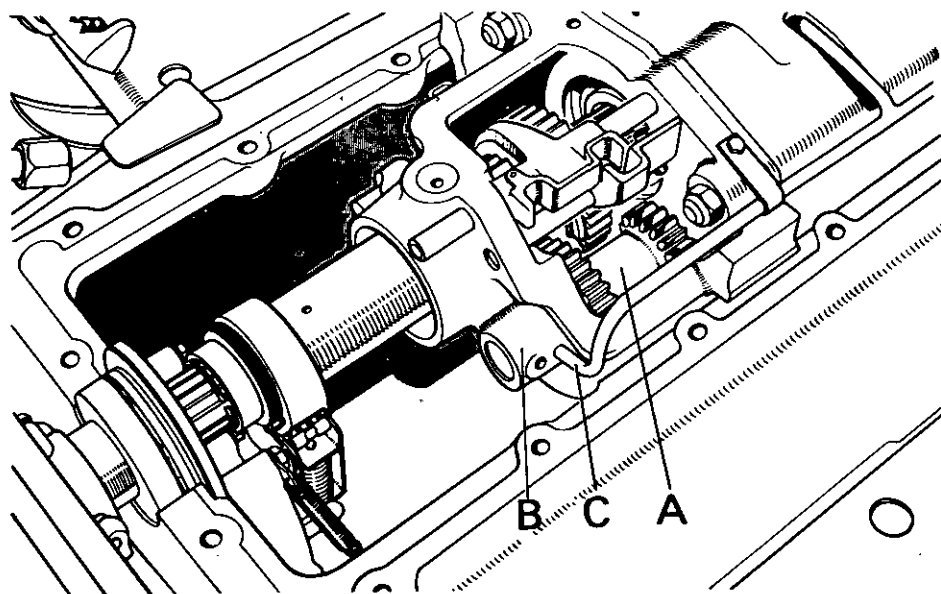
OIL FEED PIPE — 12-SPEED GEARBOX
